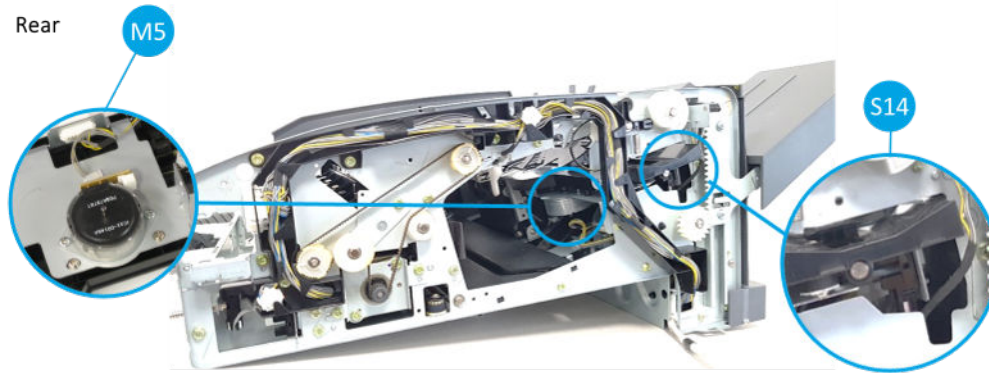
Inner finisher system - tamper unit detail view (3 of 3)
